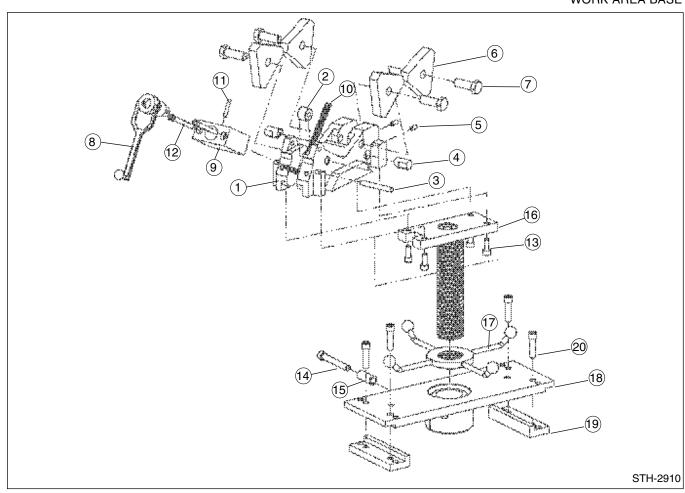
FIGURE K - TUBE SUPPORT FIXTURE ASSEMBLY
